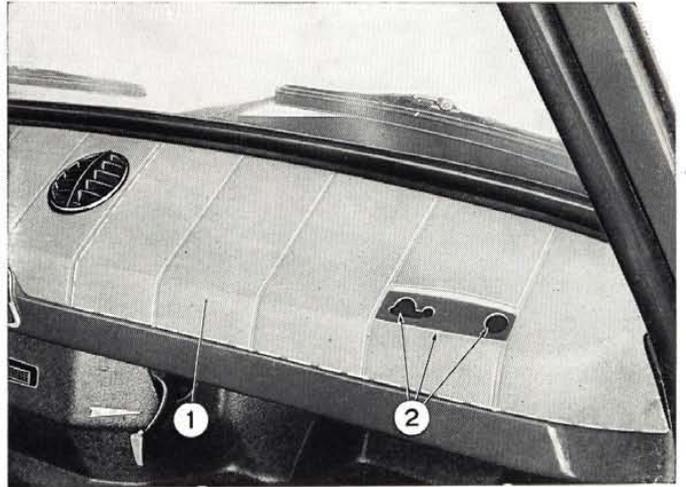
Fitting the templet for cutting out the instrument panel lining and fashioning the panel holes, preparatory to the radio set installation.
